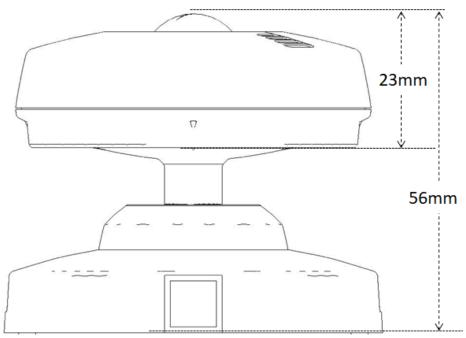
LDSBus Multi Sensor Dimension – Side View
